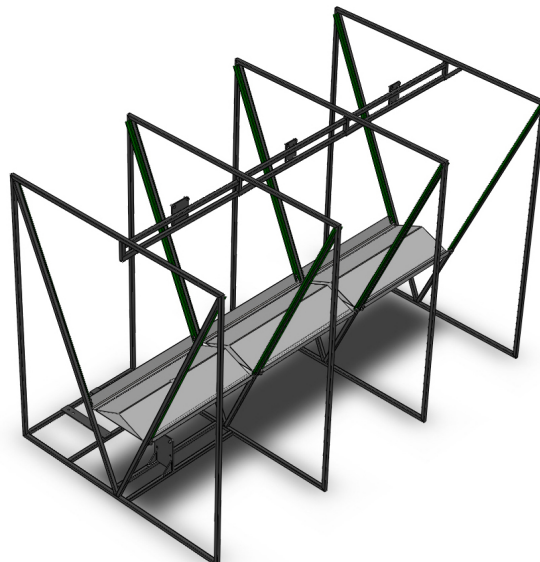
Final assembly of supporting frame structure for the radiators [3]
